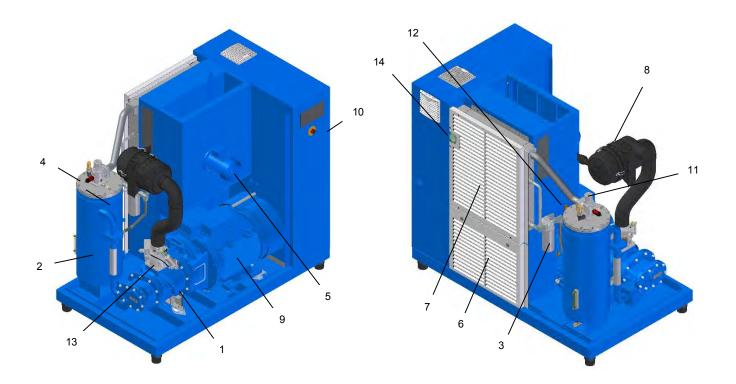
Screw compressor G/V Drive 38 – 45, 56 – 75
